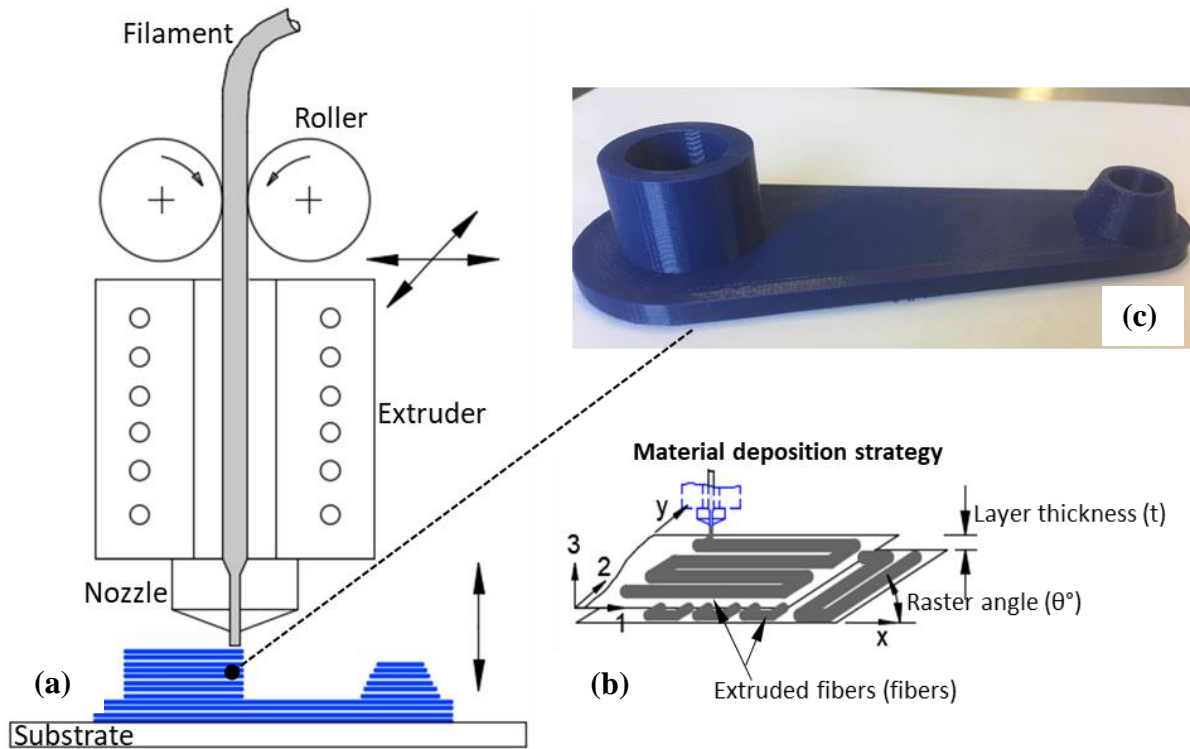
3D printing of a part via fused filament fabrication (FFF): (a) FFF process, (b) material deposition strategy, and (c) 3D printed part.
